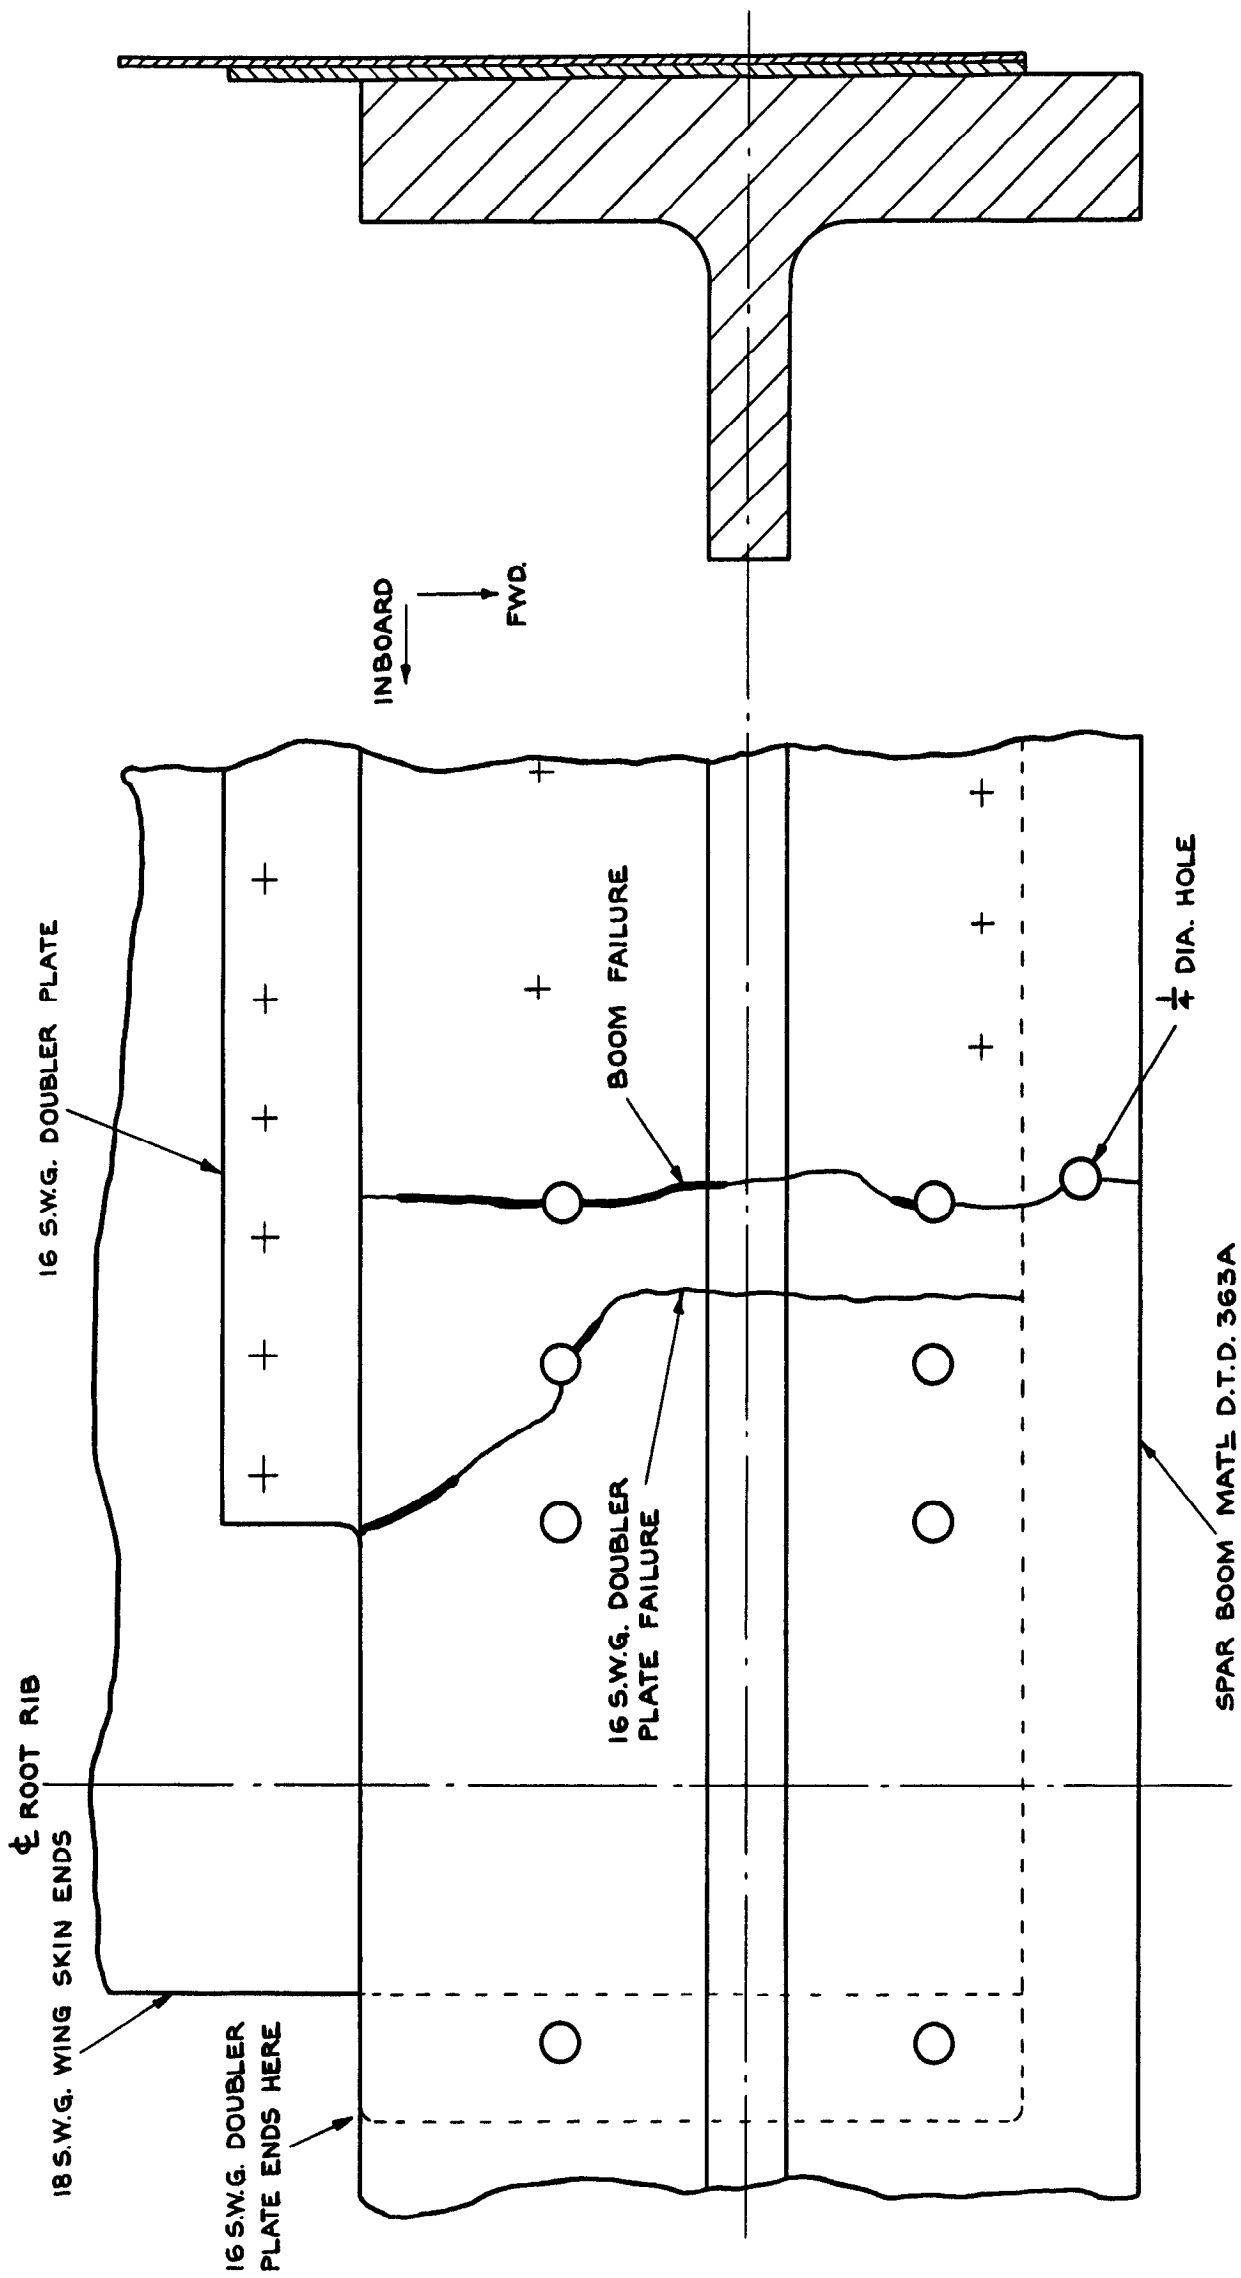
SPAR TENSION BOOM FRACTURE (PORT INNER WING) AND ASSOCIATED FATIGUE CRACK IN DOUBLER PLATE 170,500 GUST LOAD CYCLES FIRST TEST.
